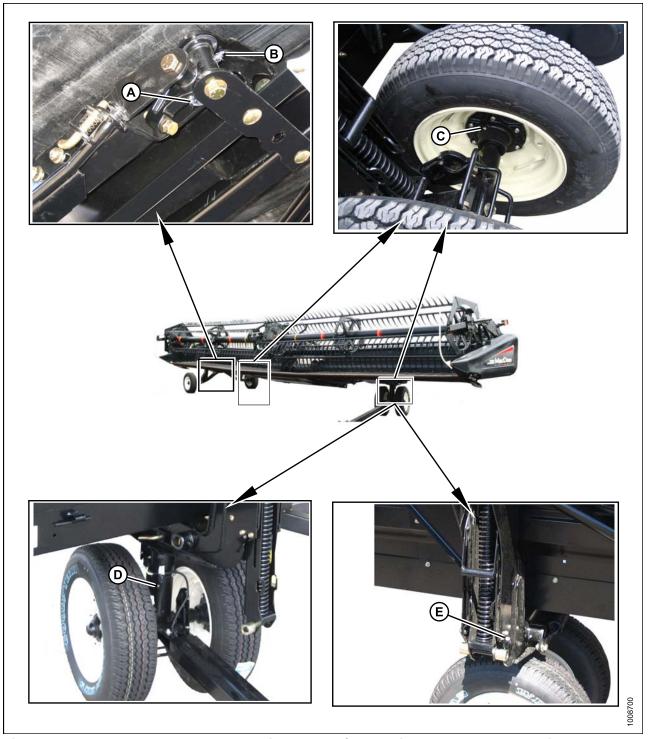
Rear Wheel Axle, Wheel Bearings, Frame/Wheel Pivot, and Front Wheel Pivot
